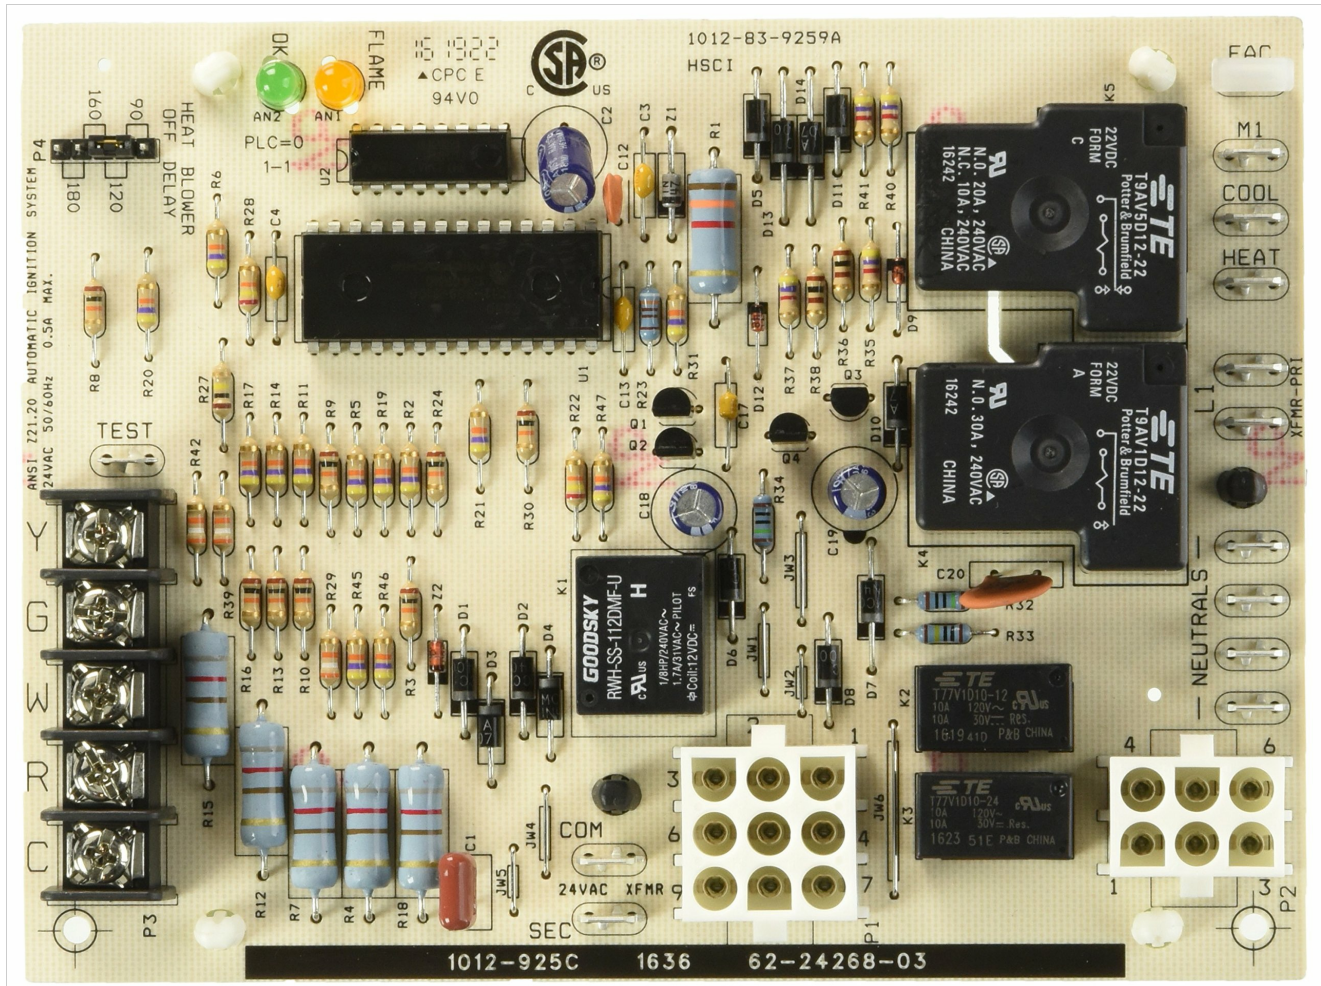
Image: The Protech 62-24268-03 Integrated Furnace Control Board, shown with approximate dimensions of 4.8 inches (12 cm) in width, indicating its compact size for furnace integration.
